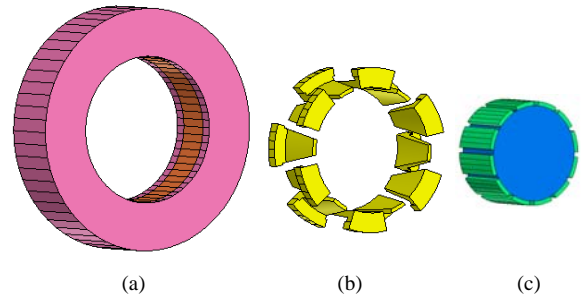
Exploded view of one-phase BDRM: (a) stator 1, (b) claw-pole rotor, (c) permanent-magnet rotor 1.
